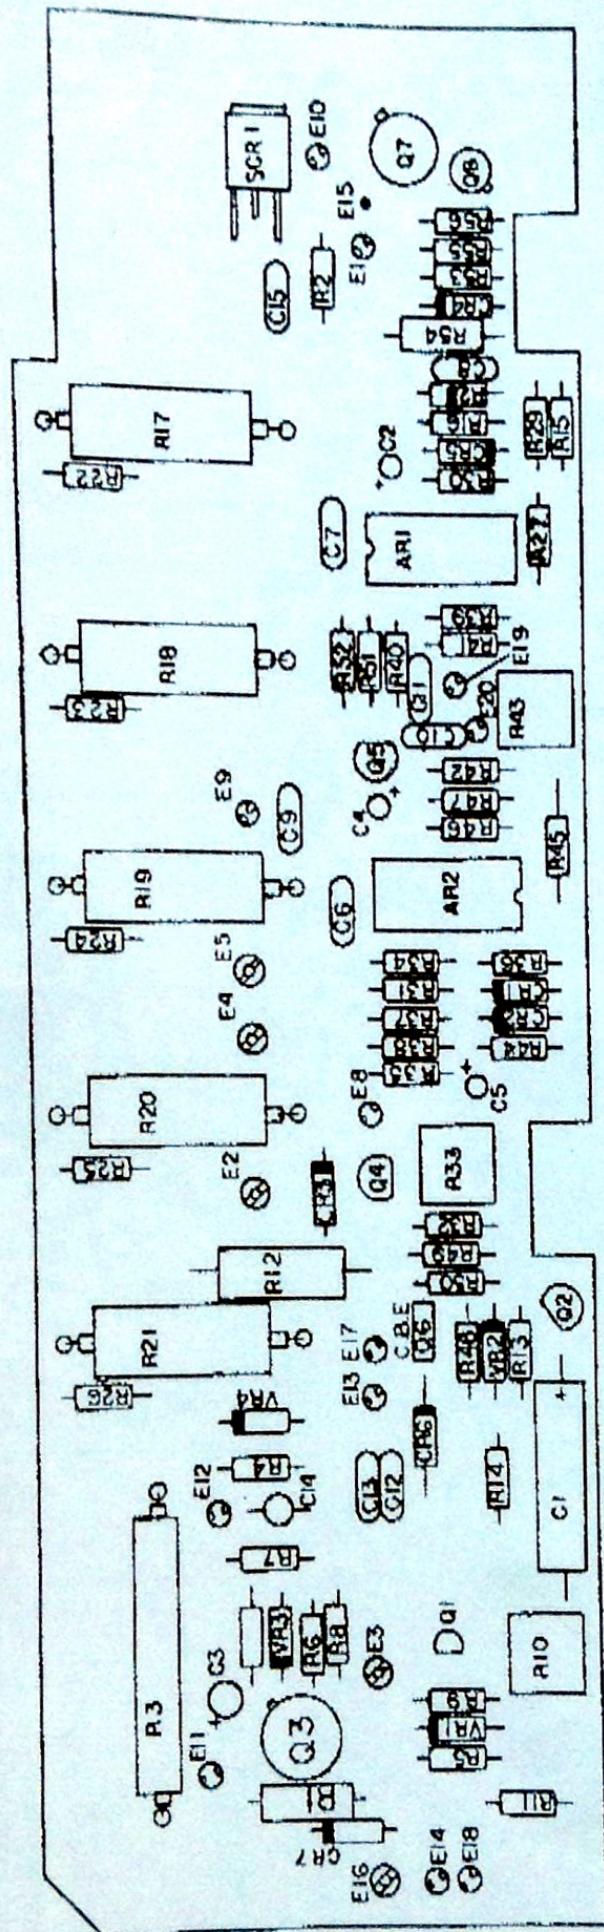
3A2A1 Regulator/Protection Assembly (6628-2350)
